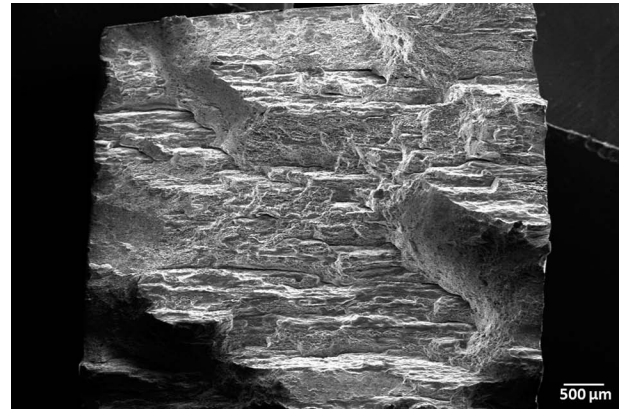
Fracture surface of a room temperature tensile-tested AA 2219-T851 ring rolled ring taken at low magnification
